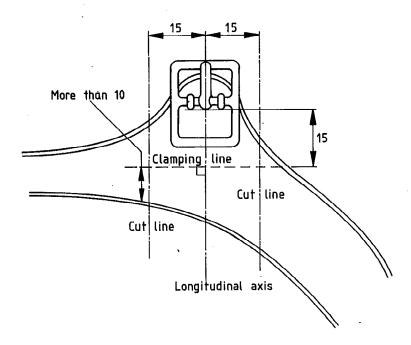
/6b. Type A test piece cut from the upper of figure 5.11/6a
